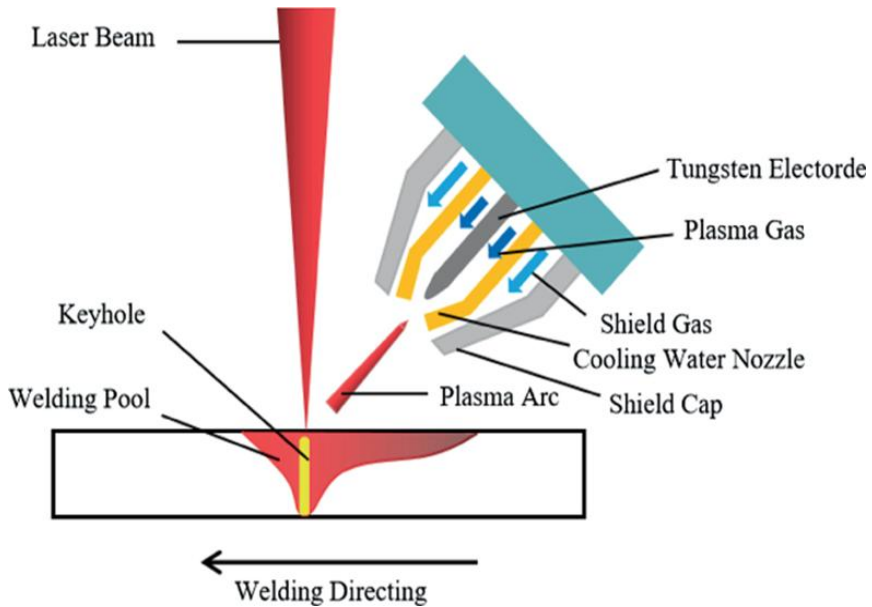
Laser-Hybrid Plasma Welding diagram.
